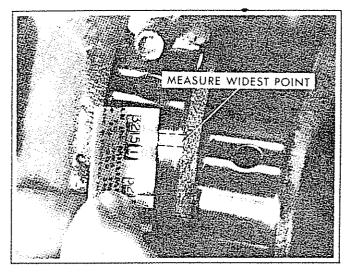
A2 39-Measuring Gaging Plastic-Typical mum undersize, replace crankshaft.
